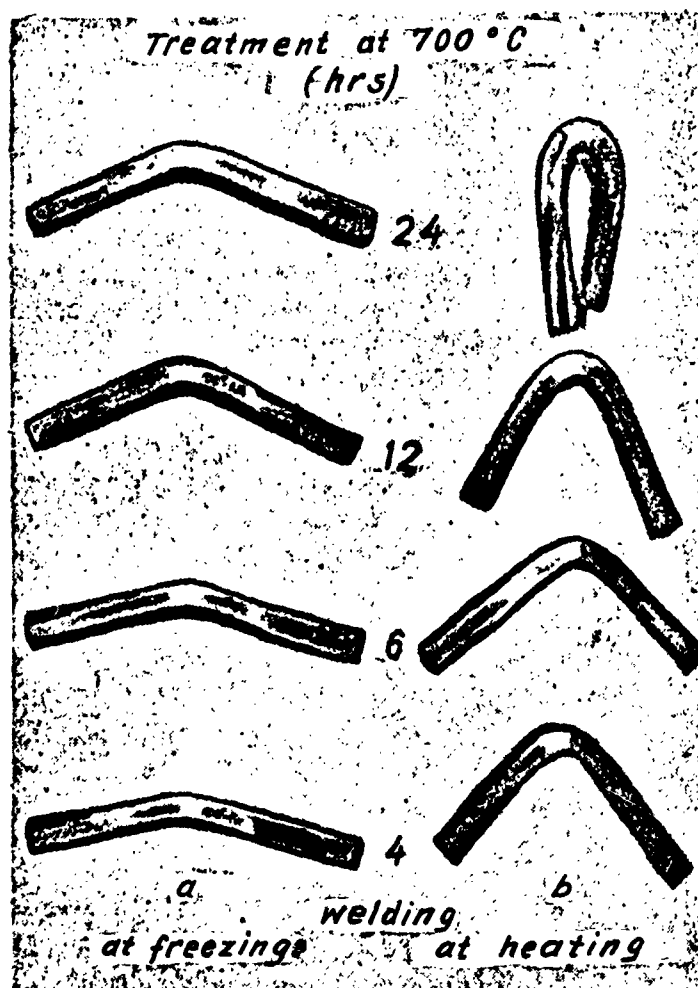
Effect of cooling conditions during welding on the immunization rate of welded specimens at 700°C; a -- specimens welded under conditions of rapid cooling; b -- under conditions of slow cooling.
